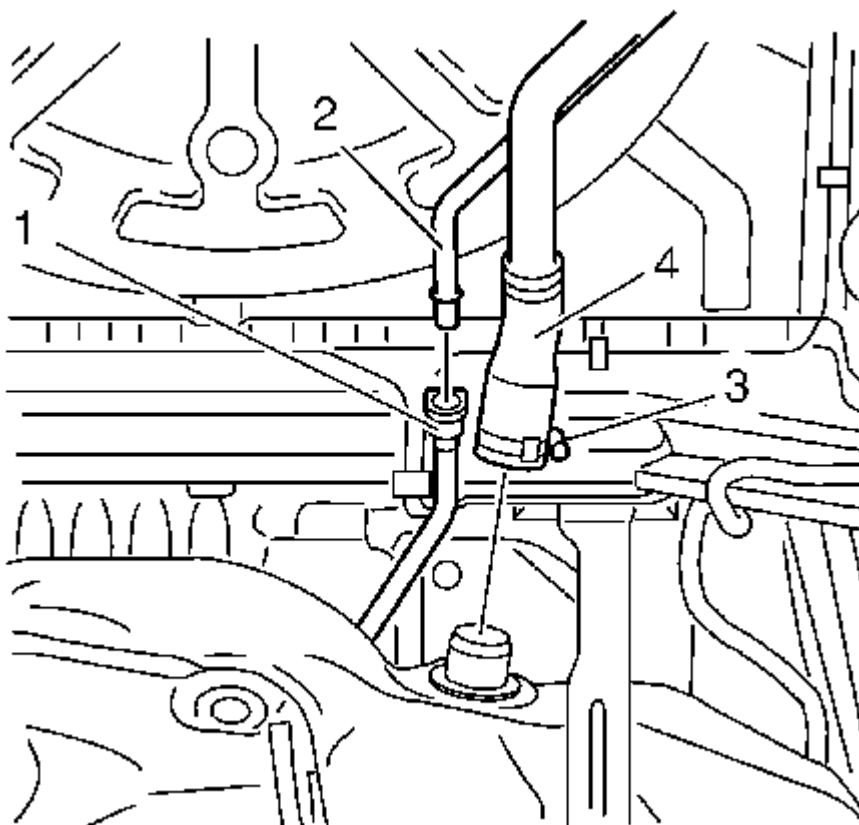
Chassis Fuel Feed Pipe, Quick Connect Fitting, Fuel Pipe & Retainer
